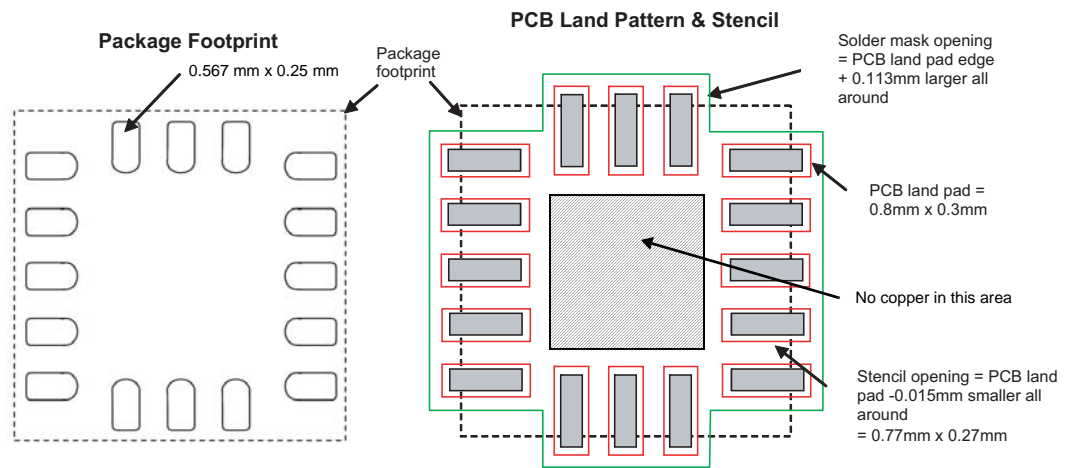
Recommended PCB land pattern, solder mask, and stencil opening near package footprint
